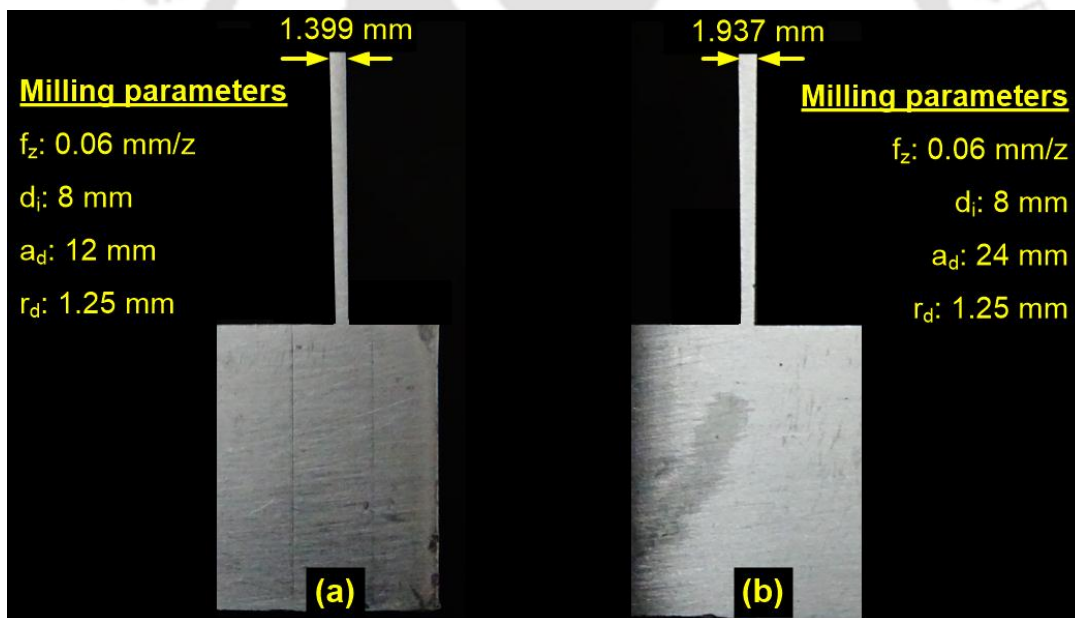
Side profile of a thin-wall after machining a 1.25 mm wall with: (a) 12 mm axial cut depth, (b) 24 mm axial cut depth
